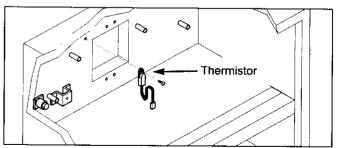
700BC/I-3 Refrigerator Thermistor
